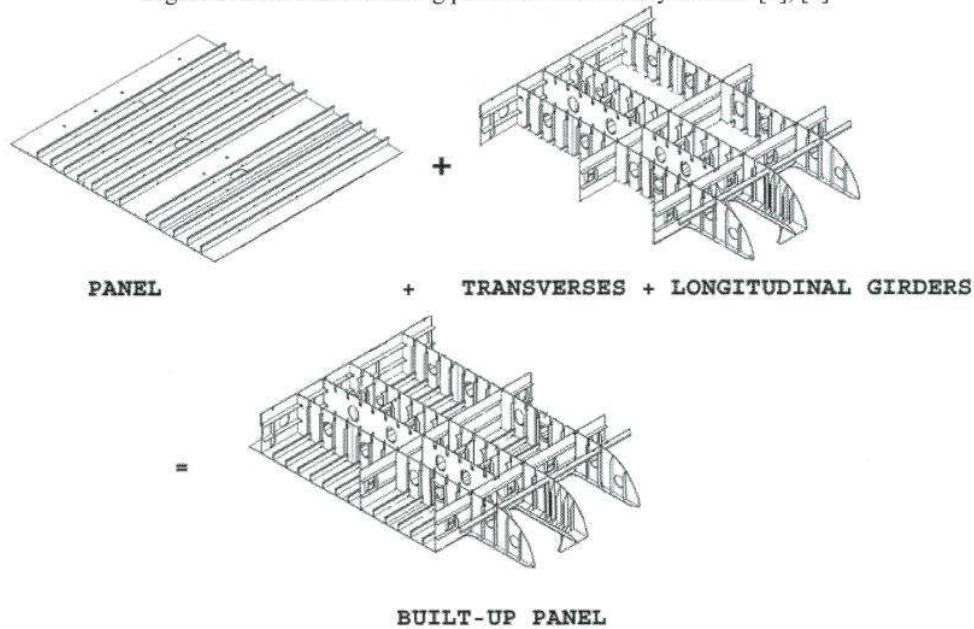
Assembly sequence on the Lean built-up panel assembly line
